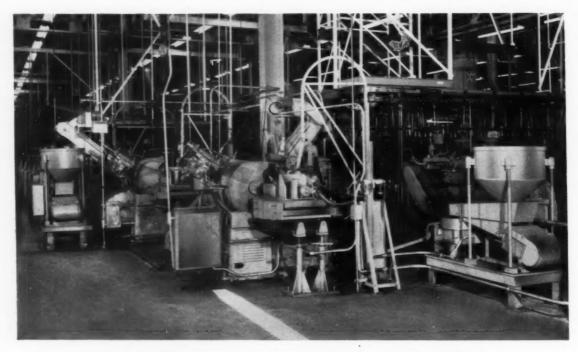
Outside diameters of races are reduced to between 1.0630 and 1.0633 inches by passing the parts through three centerless grinding machines.
